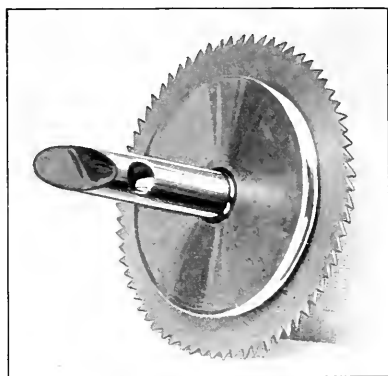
Two-inch single saw with saw-guard for regulating depth of saw, in position on mandrel, ready to be placed in chuck of motor.
